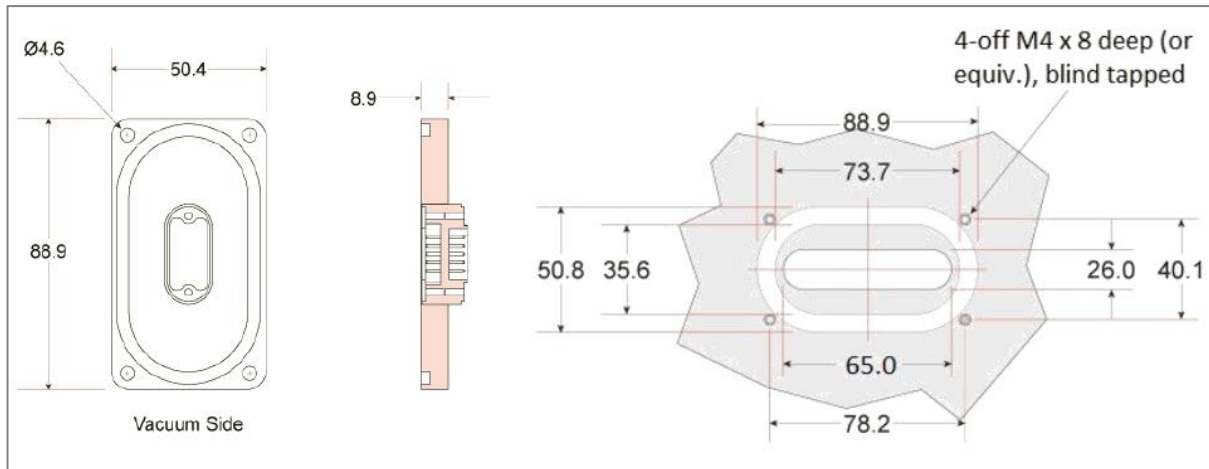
Dimensions and cut-out for Camera Link Feedthrough Flange.
